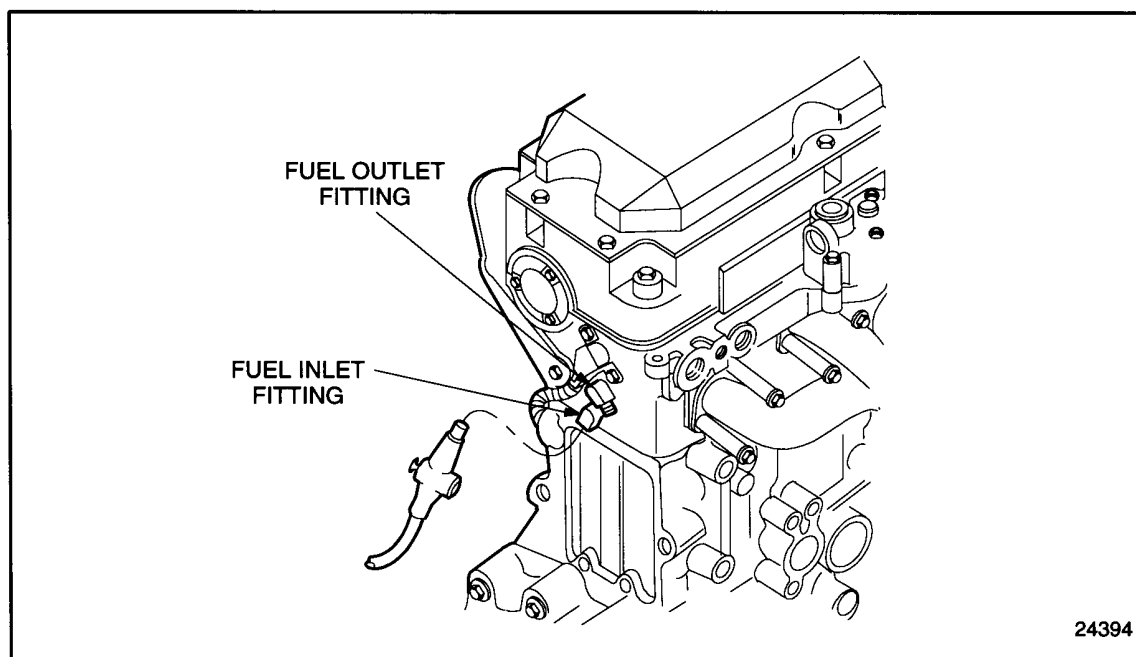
Removing Fuel from Cylinder Head Internal Passages
